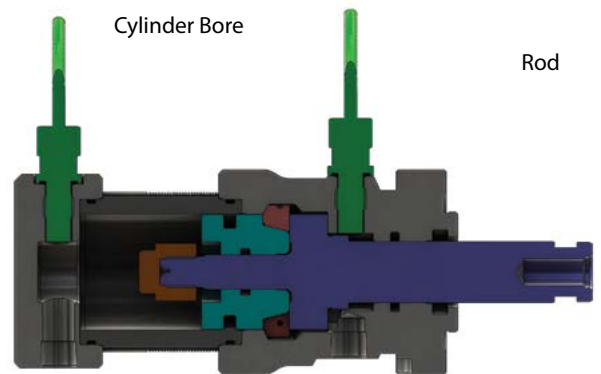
Slide Movement example using the Hydraulic Locking Core Pull Cylinder.
